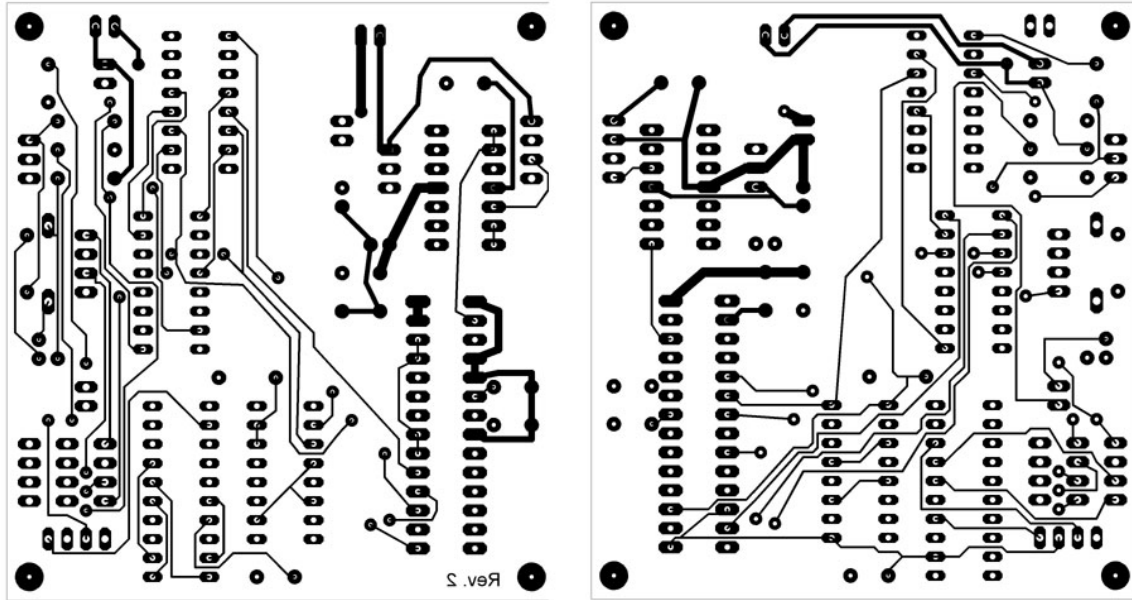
APD-SA ADC and logic circuit PCB layout top (left) and bottom (right); top side is inverted so that when printed on laser jet transparency film, the ink side faces the PCB surface; should be scaled so that ICs are 0.3 inches between sides and 0.1 inches between neighboring pins
